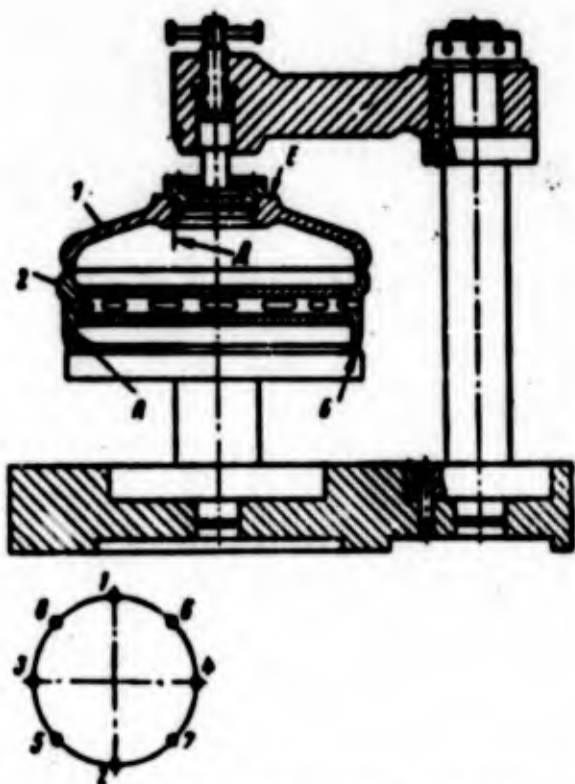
Diagram of fixture for tack welding outer dome. 1) outer dome; 2) head casing.
